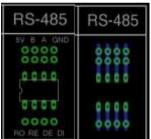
Diagram of component layout and PCB wiring on the RS-485 block
